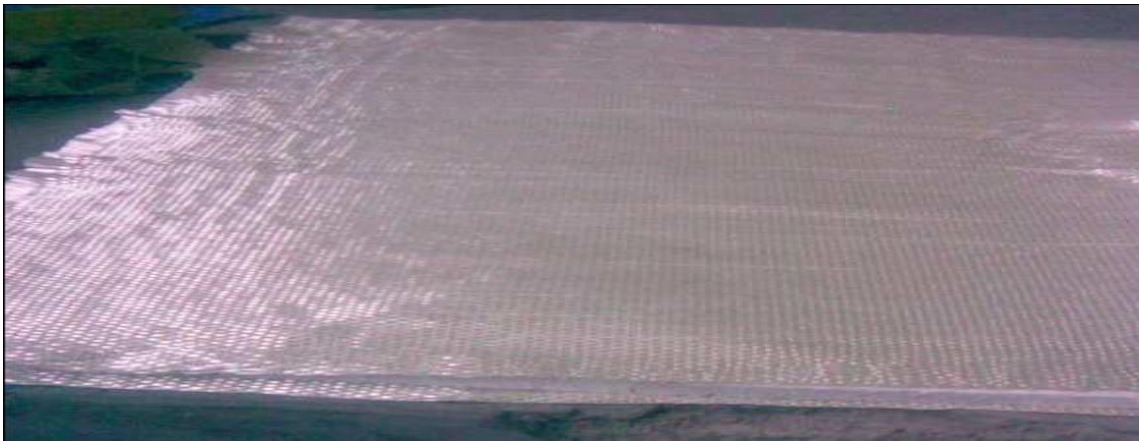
Uncoated GFRP sheet used for making specimen
